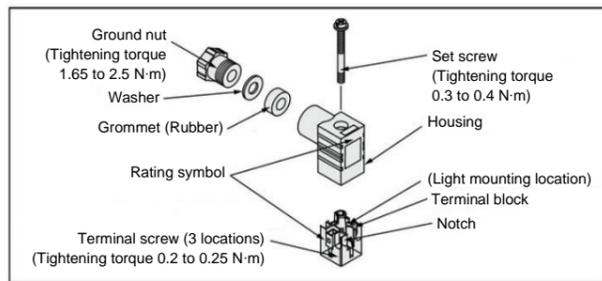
DIN exploded view for SF4, VQZ and VK pilot valves
